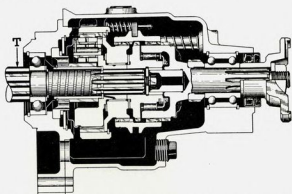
Sectioned Aero-Drive Unit Which is Bolted to End of Transmission. "T" is a Continuation of the Transmission Mainshaft
